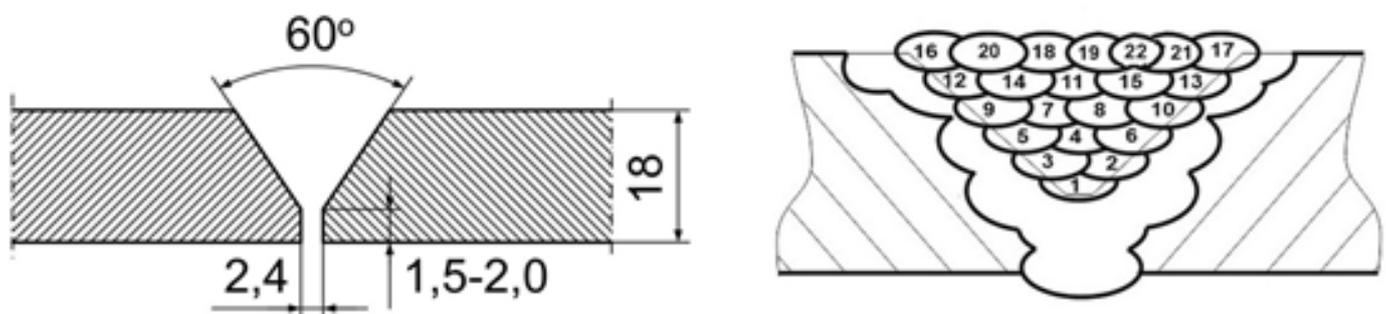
Shape and dimensions of the weld groove a) and the welding sequence in the repaired joint b)
